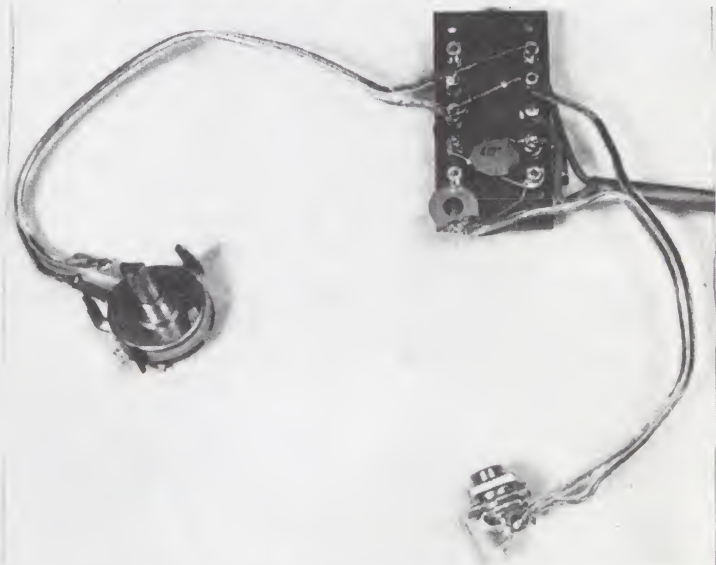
This photo illustrates how the circuit of figure 1 can be assembled using a small turret terminal board. The transistors and R5 are mounted out of sight on the rear side of the board.
